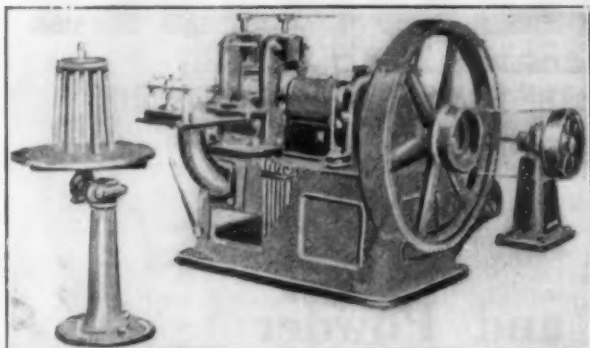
Rolling Mill for the Manufacture of Aluminum Foil
